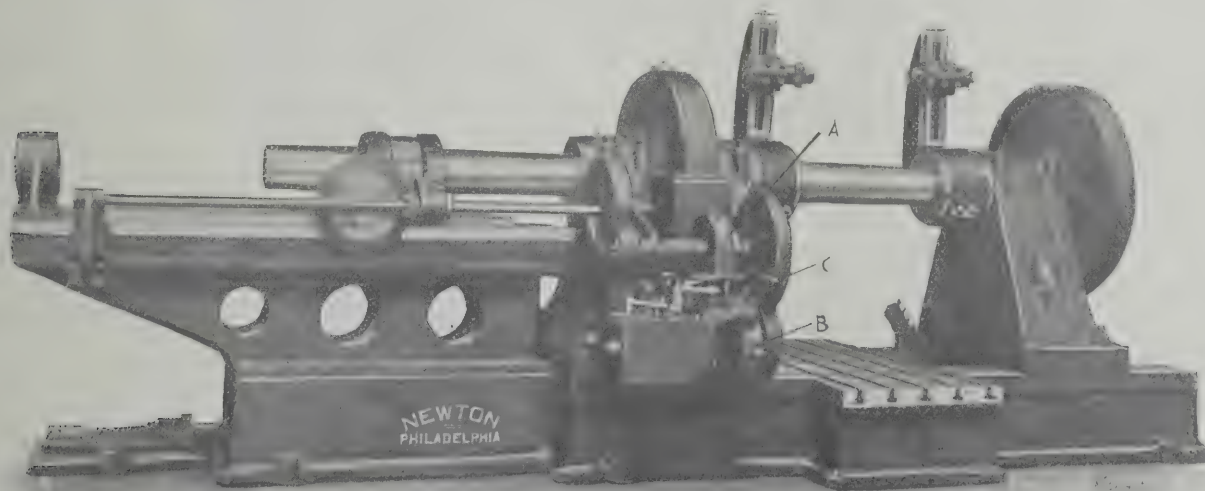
Front View of the Latest Design of Newton Cylinder Boring Machine
